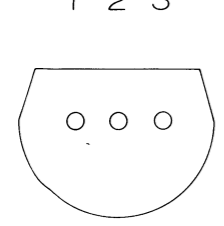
WIRING SIDE OF PRINTED WIRING BOARD (2/4)
